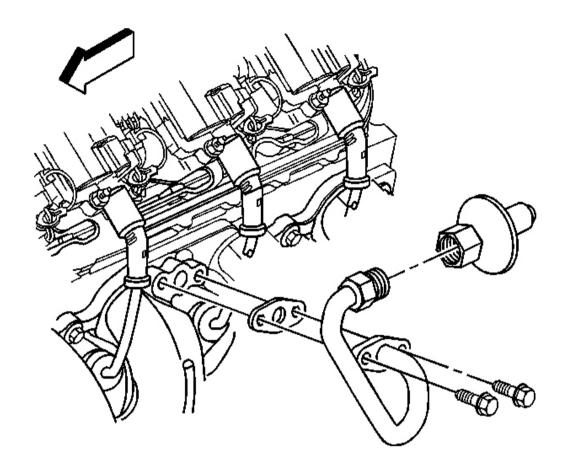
AIR Pipe, Gasket & Bolts Courtesy of GENERAL MOTORS CORP.
